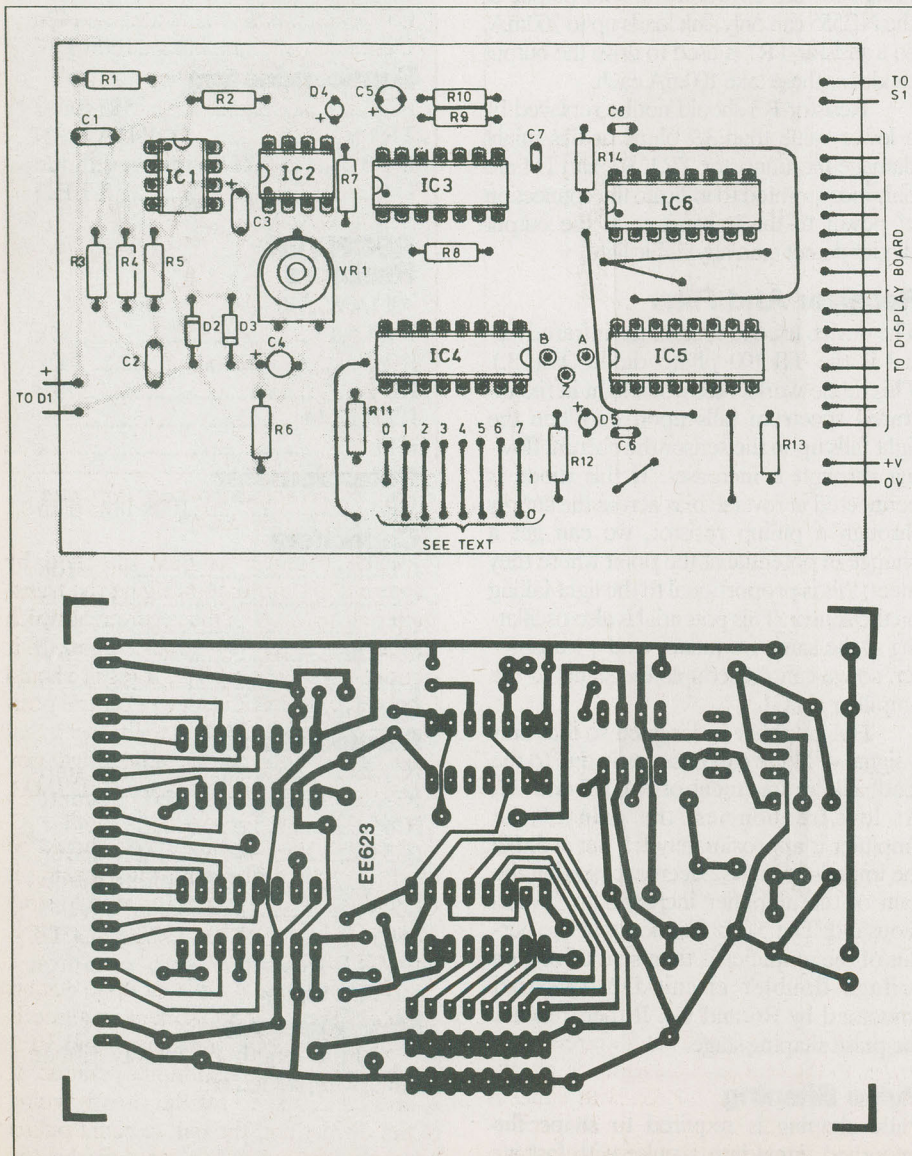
The component overlay (top) and the PCB for the Object Counter.
